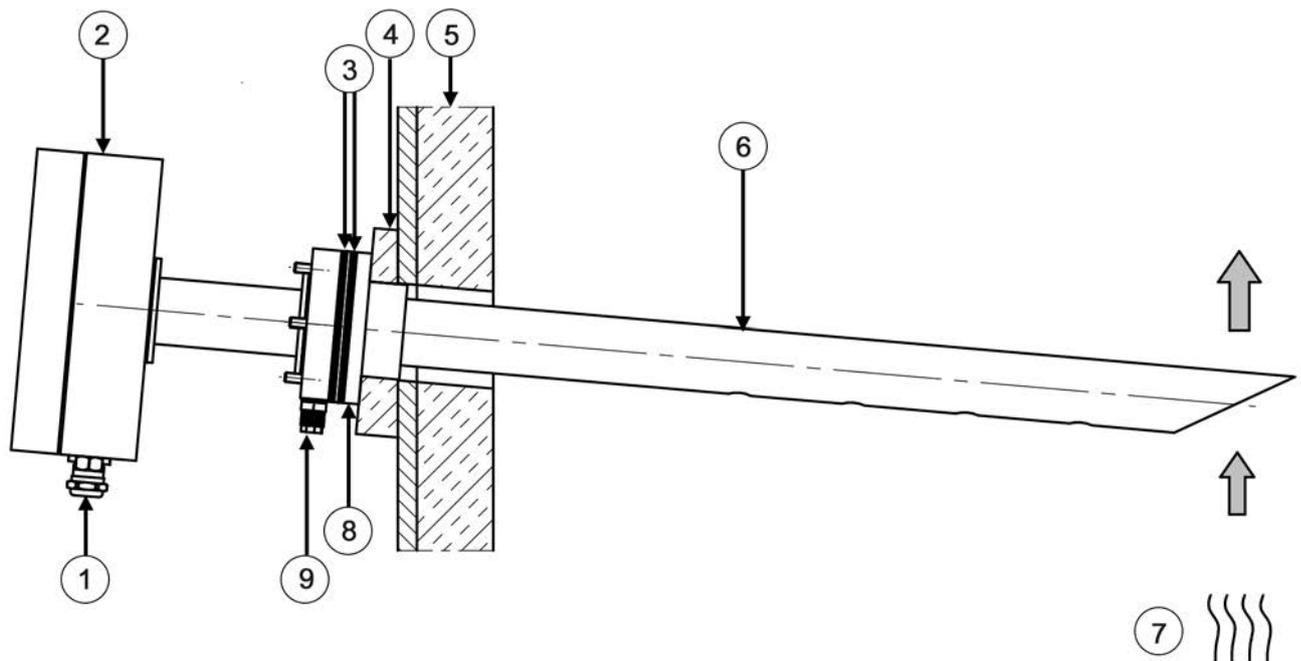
Dimensional drawing Combination Probe KS2DNO<sub>x</sub> with GED BASE
